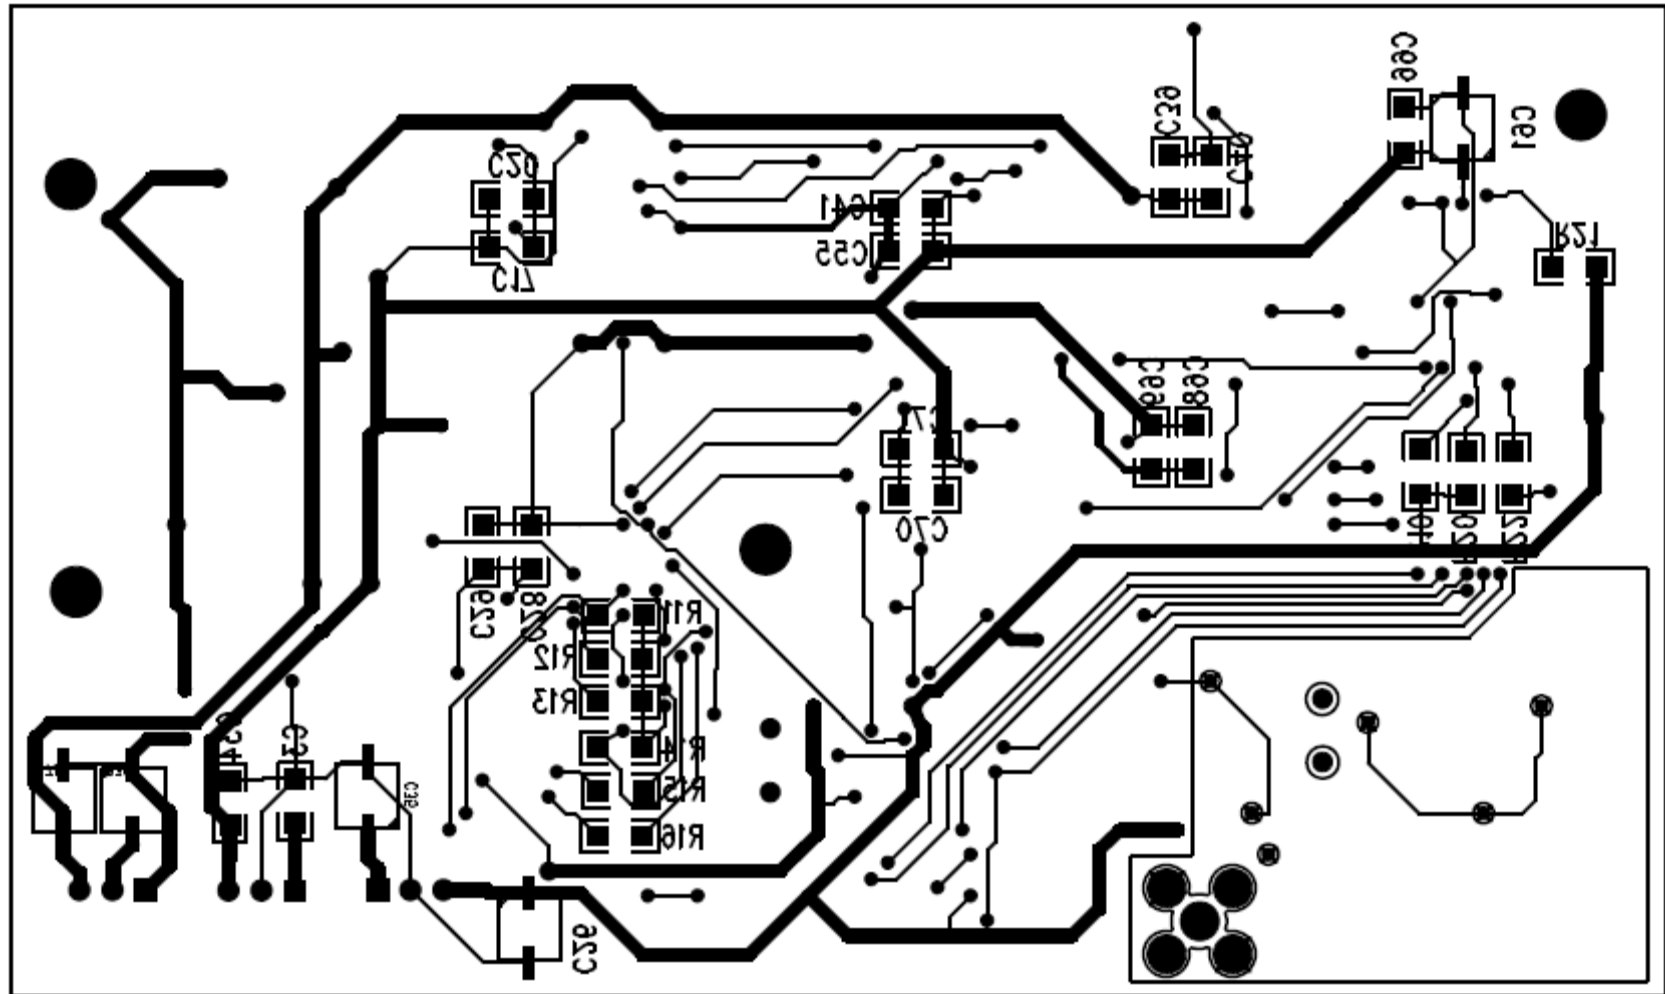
Transmitter Bottom Copper and Silkscreen Layout
